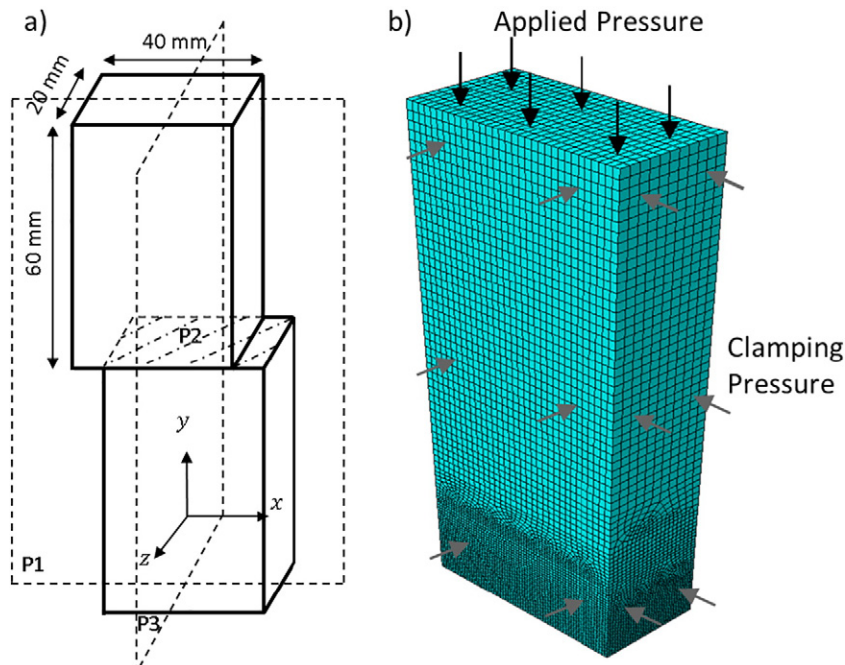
a) Workpiece dimensions, axes and planes of symmetry and b) FE model representing an eighth of the real workpiece.
